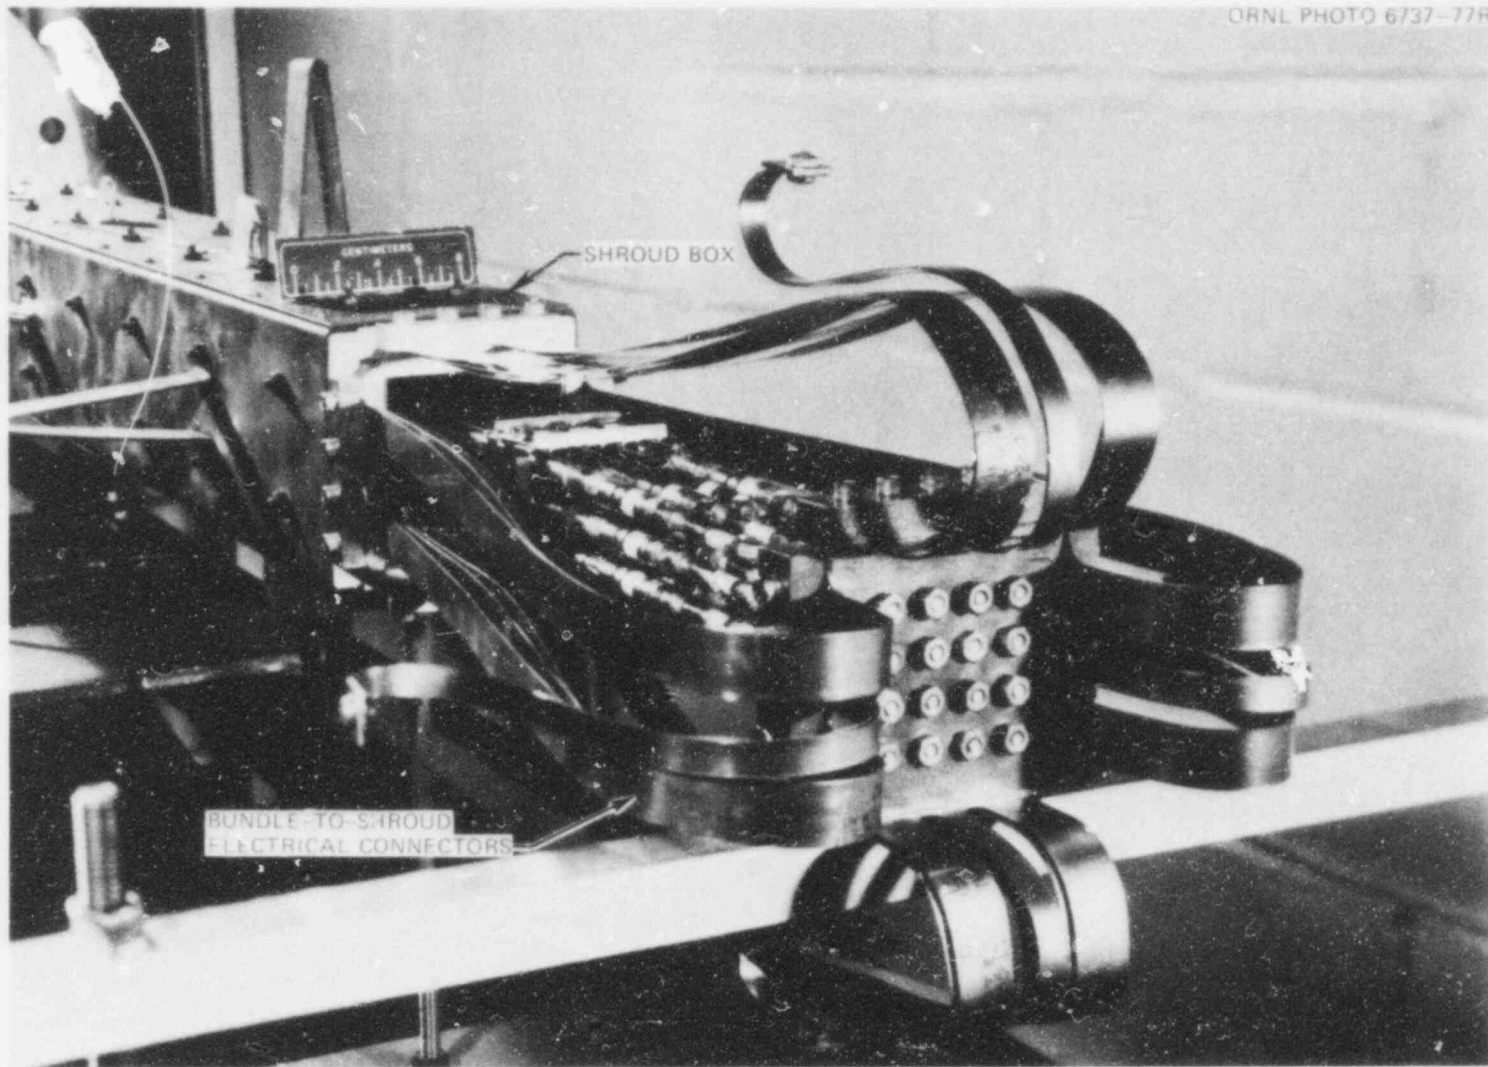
Lower end of B-1 after installation of heated shroud, shroud box, and electrical connectors.
